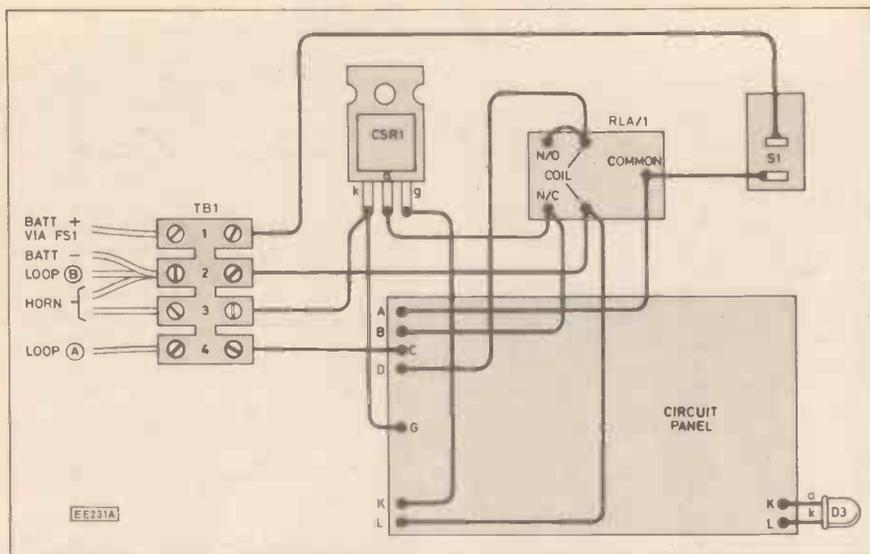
Interwiring details for case mounted components. Note that the l.e.d. (D3) should be fixed using a plastic mounting clip.
